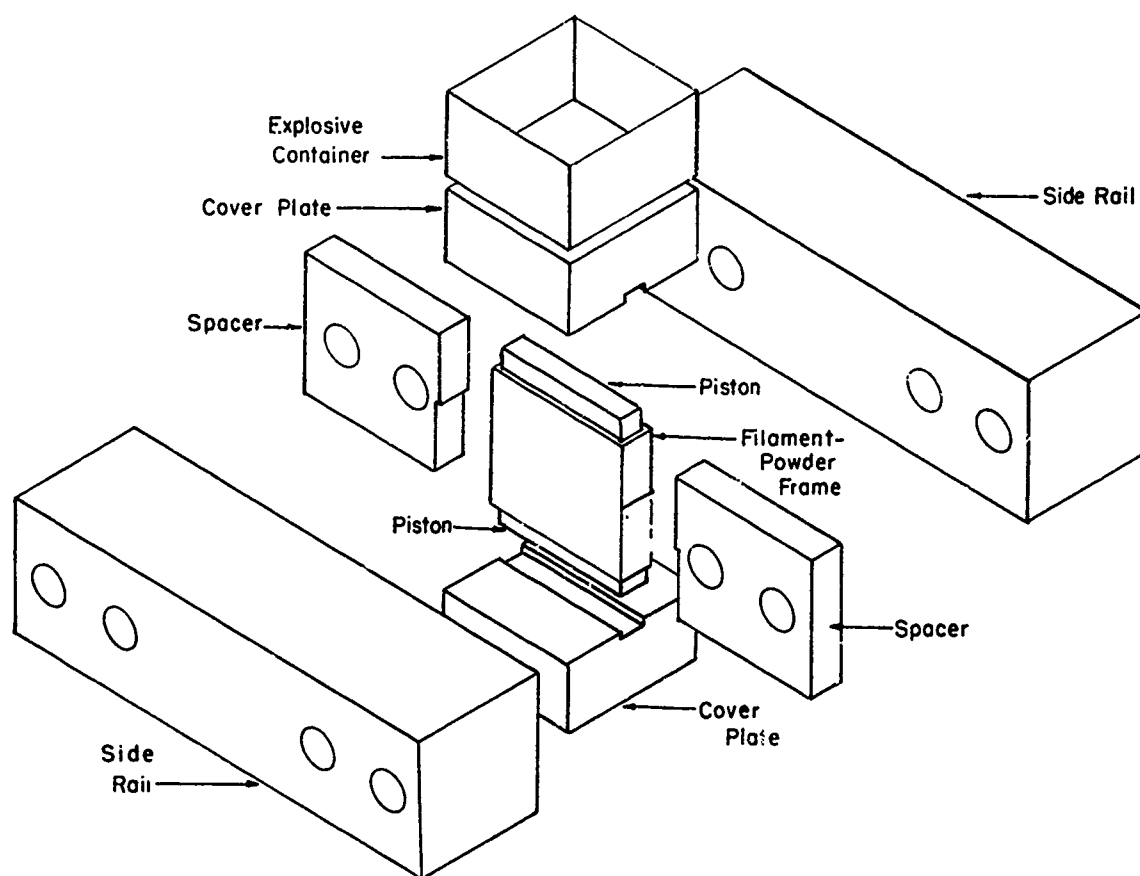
Sketch of Exploded View of Double Piston Arrangement Used to Compact Steel-Tungsten Composites
